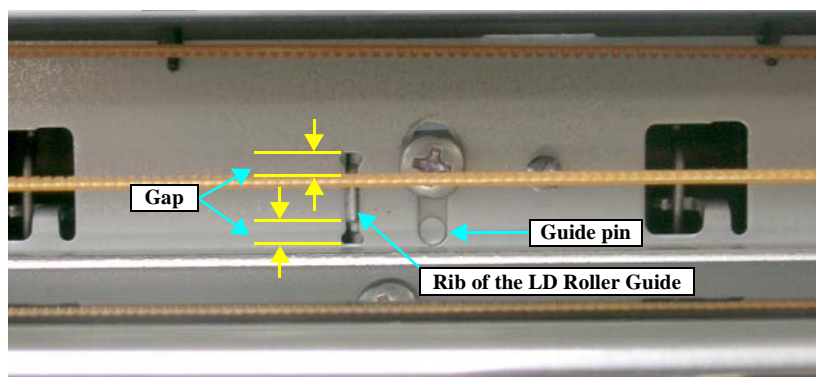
Checking the Position of Rib of the LD Roller Guide
